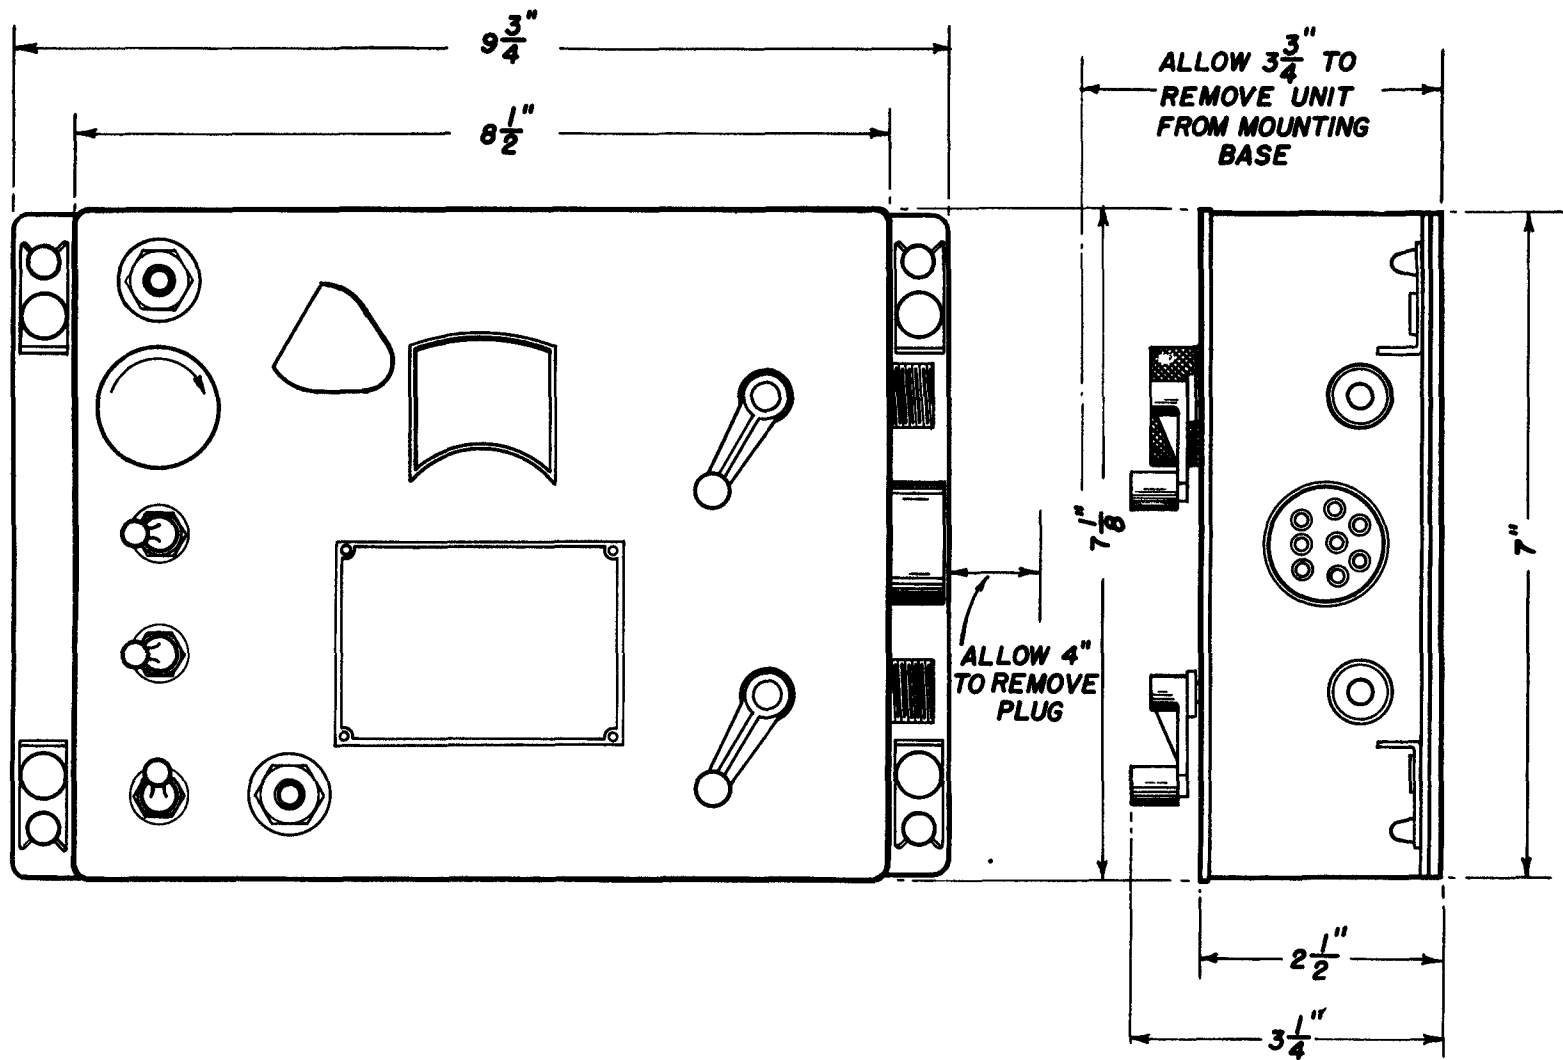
B REMOTE CONTROL UNIT OUTLINE DRAWING
